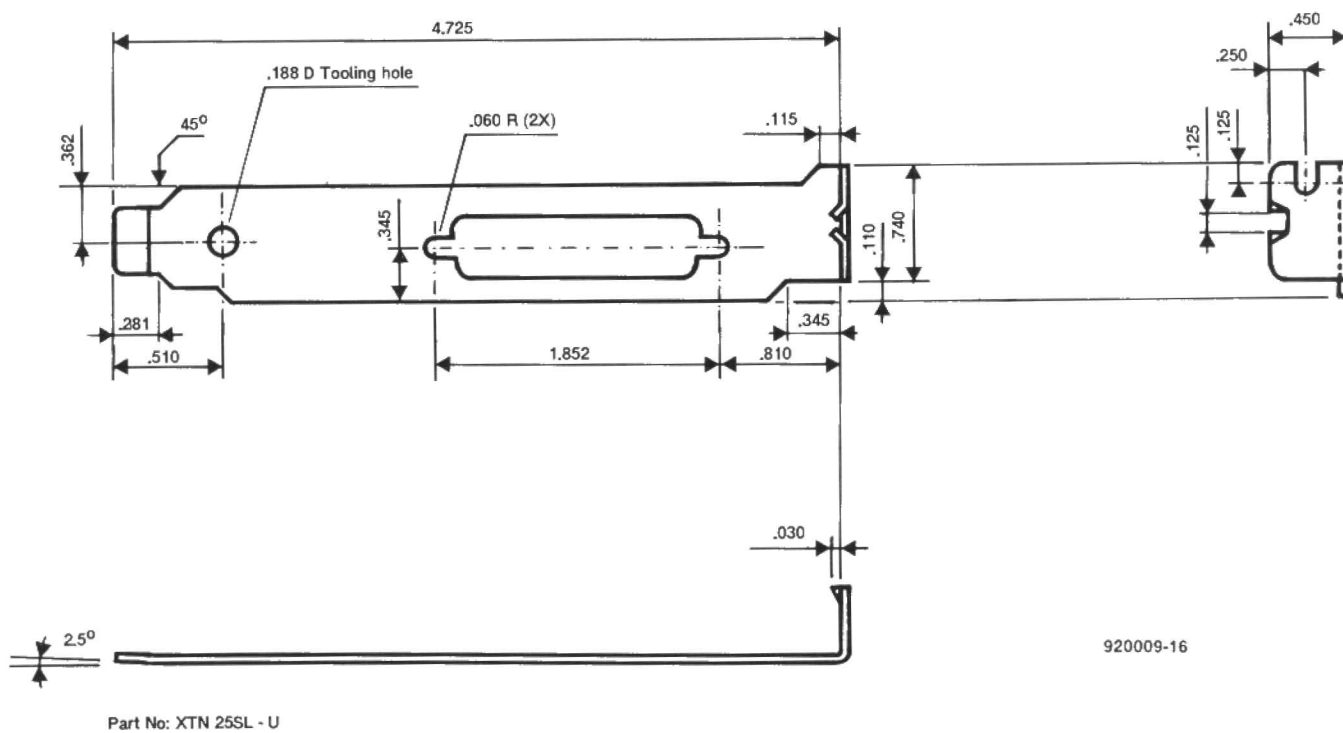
Insertion card fixing plate dimensions and drilling details.
